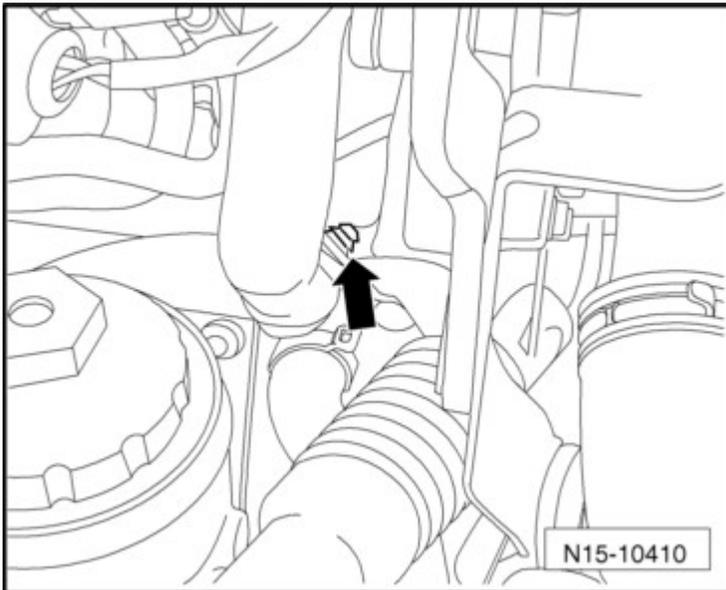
Identifying Engine Control Module (ECM) Wiring Guide -Arrow-
